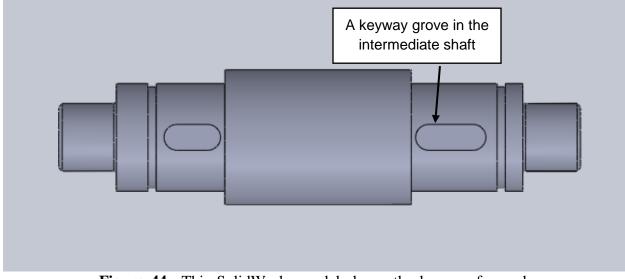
This SolidWorks model shows the keyway for each gear on the intermediate shaft. The face widths of the gears are slightly different which requires different keyway lengths.
